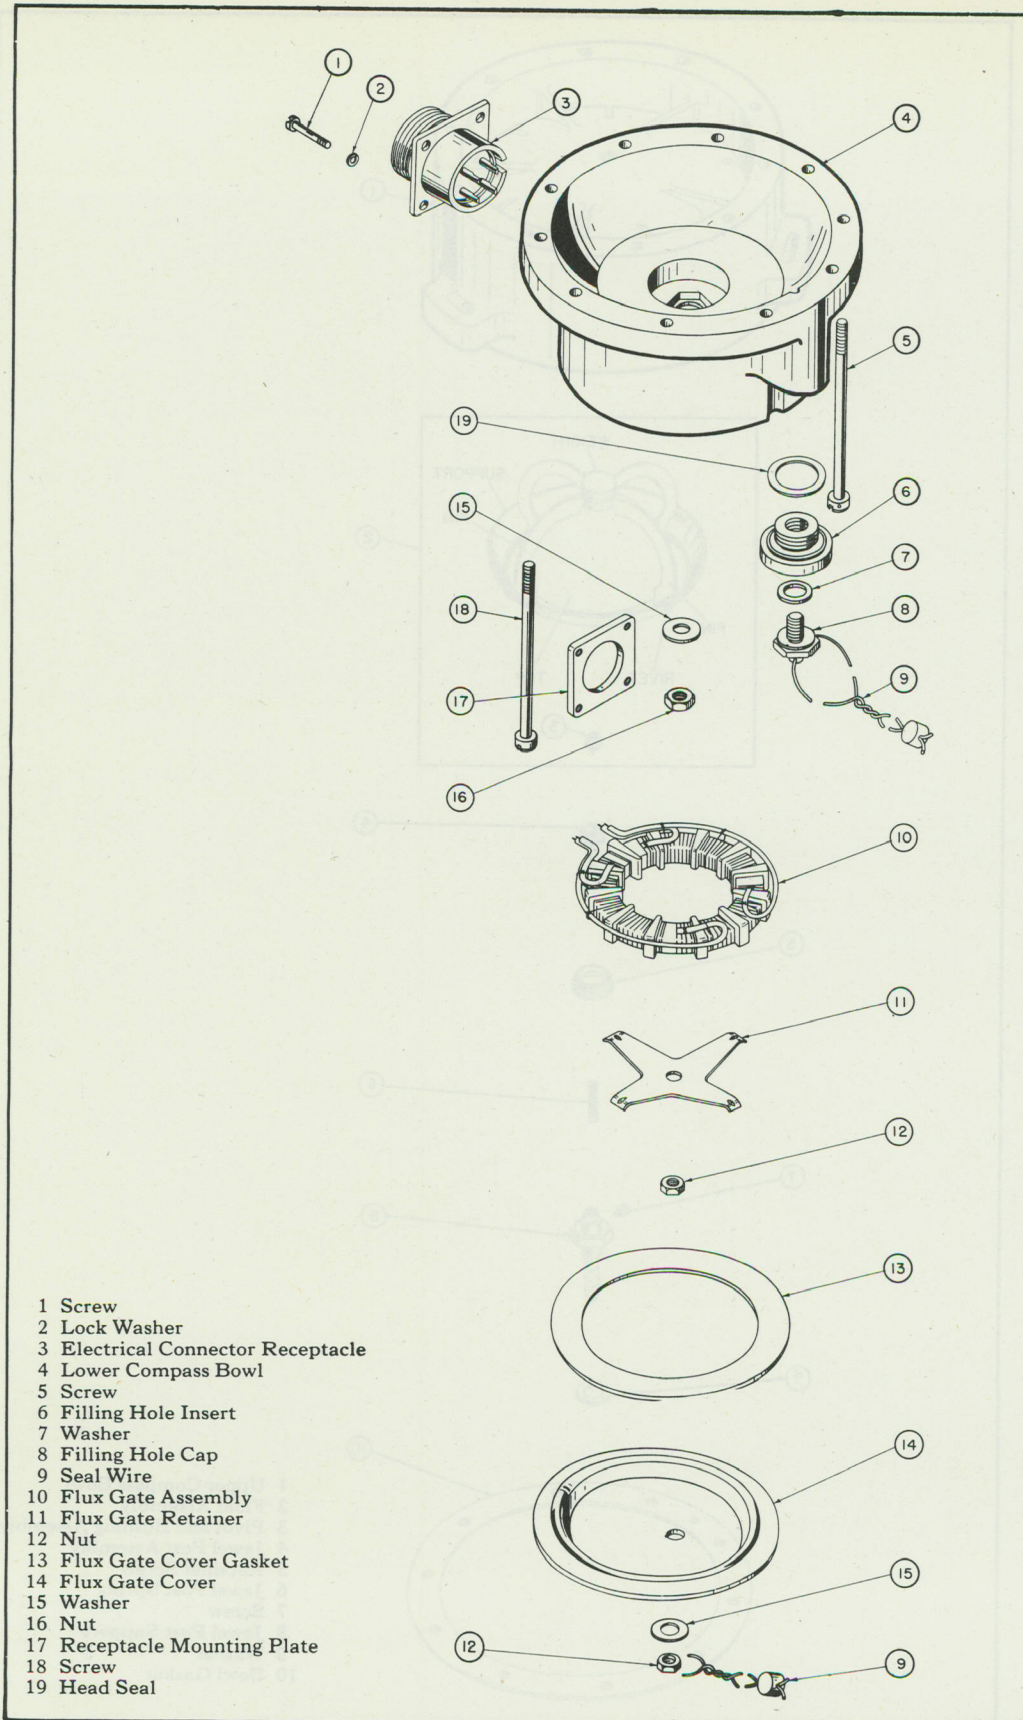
Exploded View Drawing—Main Assembly—Transmitter—Type AN 5730-3
